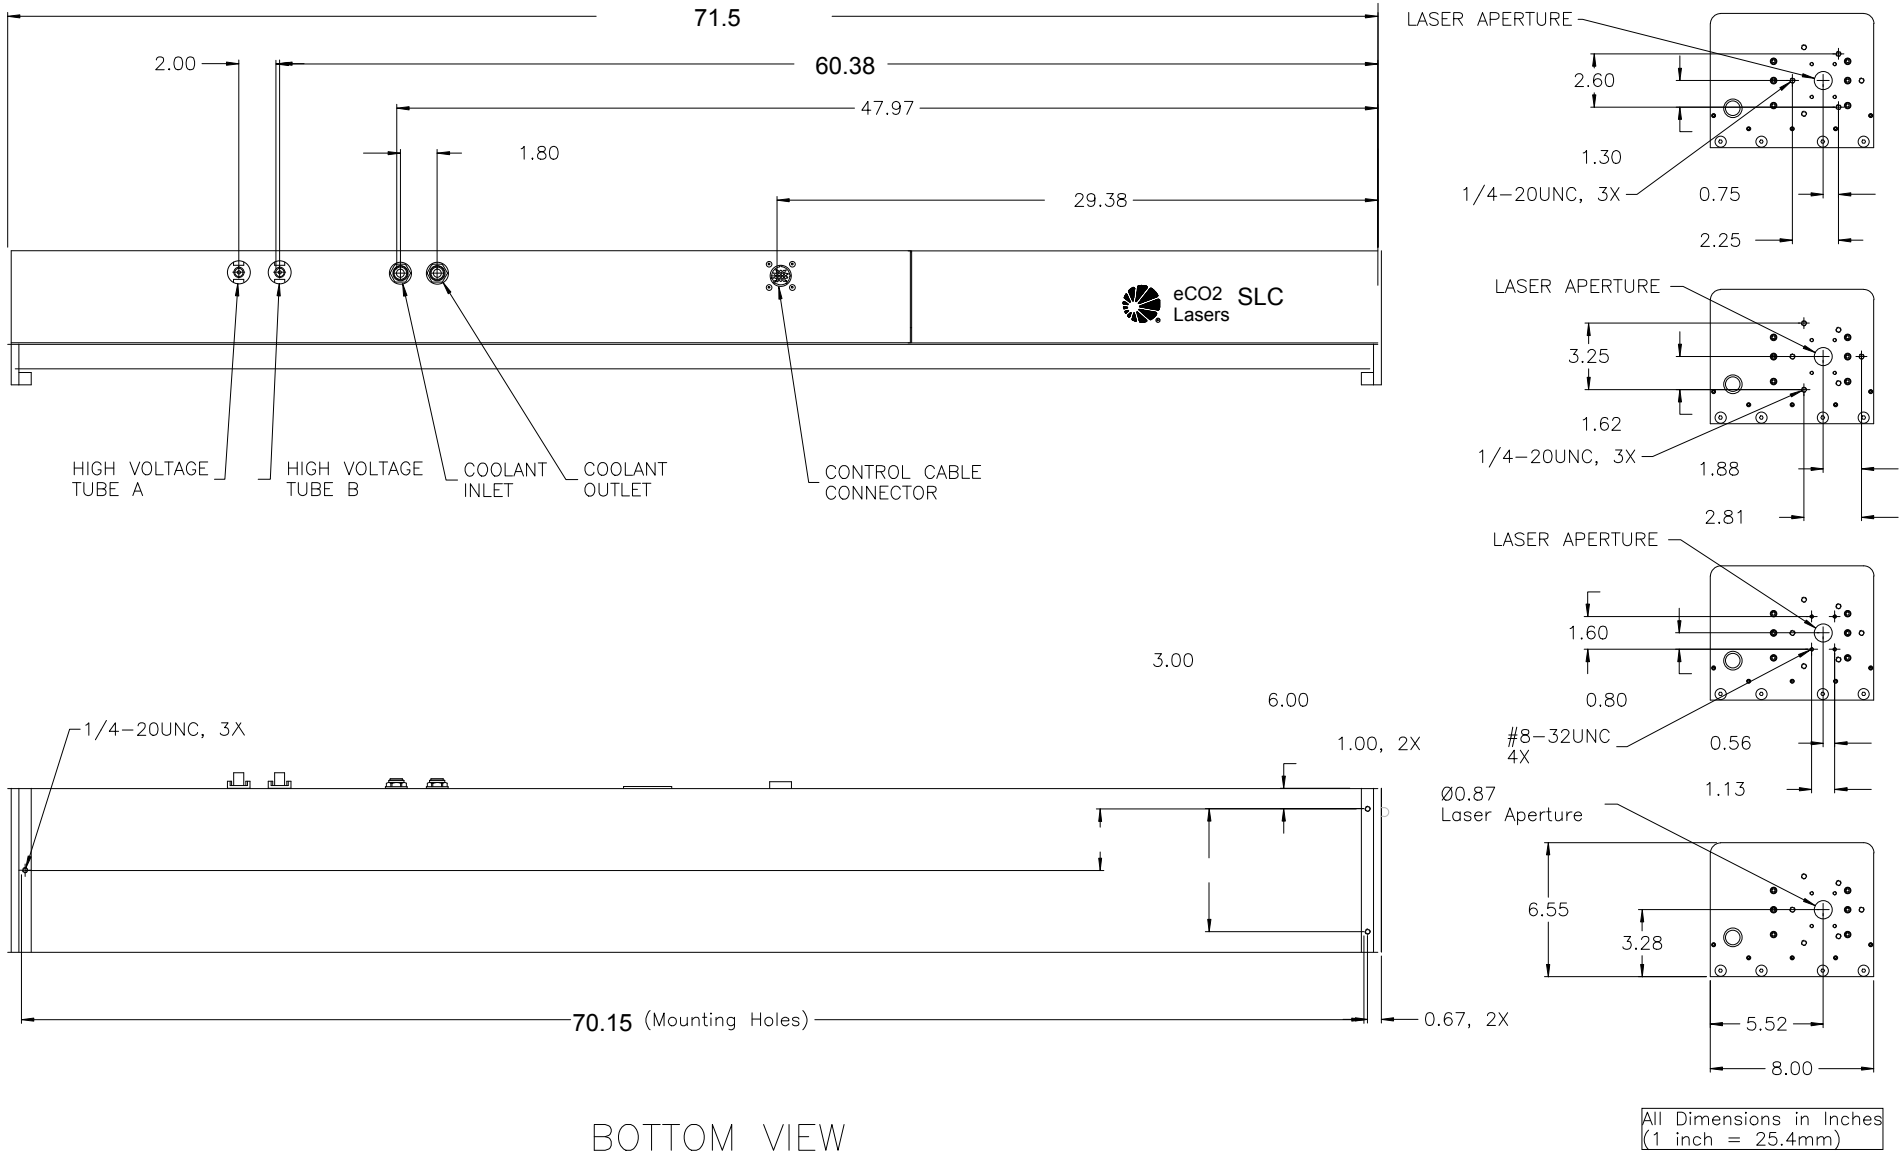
Envelop and Mounting Dimensions (SLC280x)
